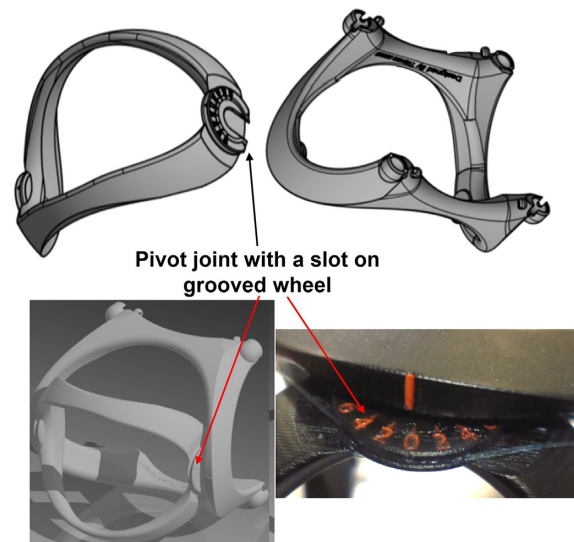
End-effector part of the robot shown with inner and outer parts pivoted together with a slot that allows both parts to slide together.
